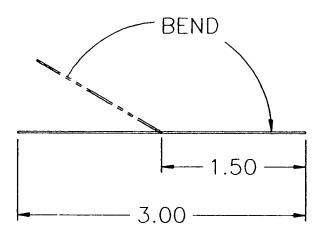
Bending of Nickel Ribbon for Top Support Assembly
